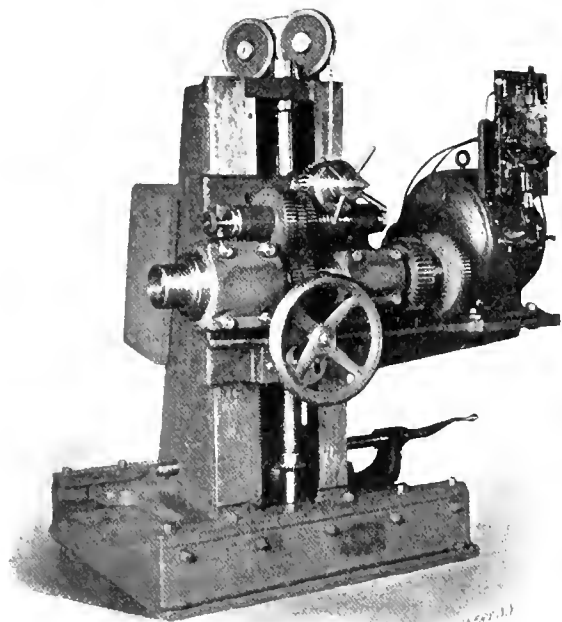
Drilling Device, Gridley Automatic Turret Lathe.
